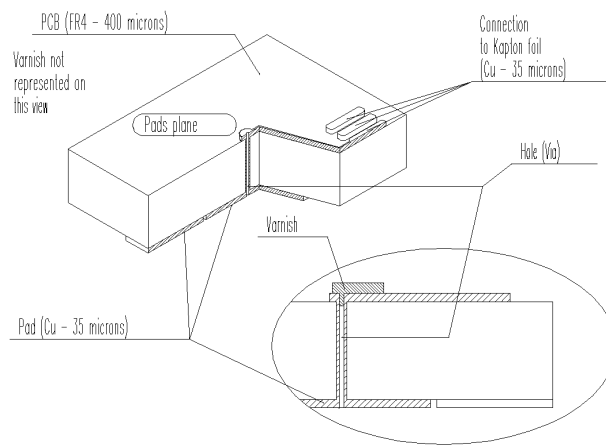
The holes of the cathode PCB are filled with varnish to render them airtight.
